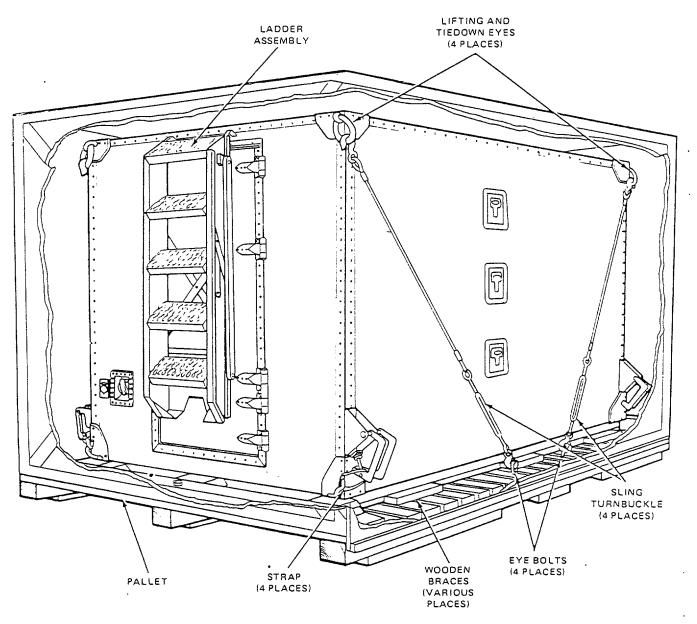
Electrical Equipment Shelter S-281/G, Packaged for Transit
